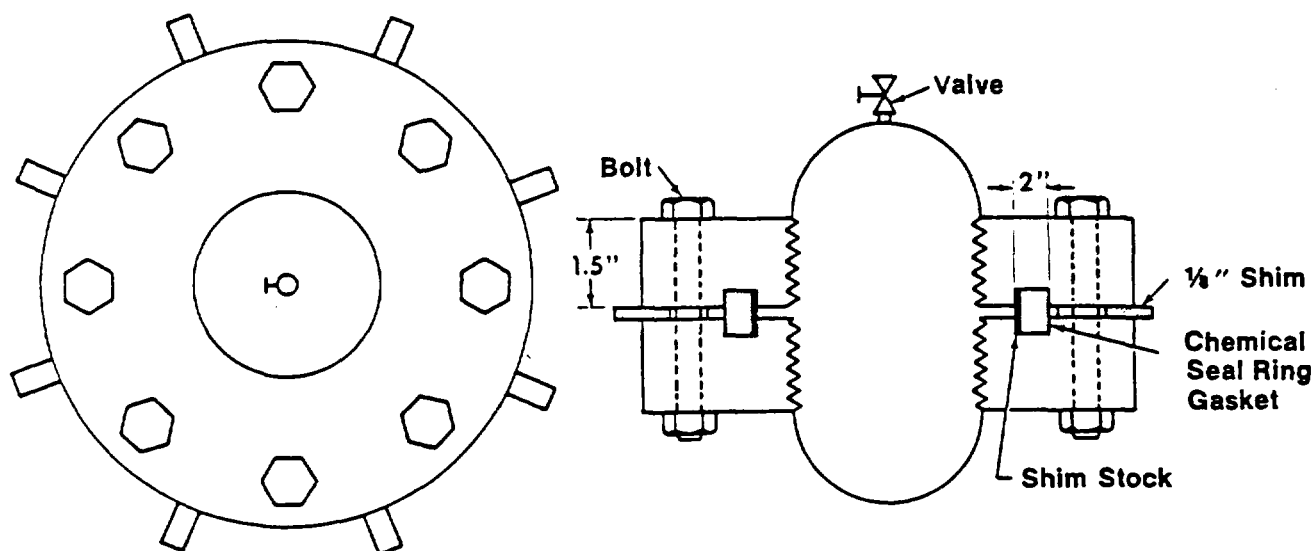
Schematic drawing of apparatus used to pressure test Dowell Chemical Seal Ring Gasket in the laboratory.
